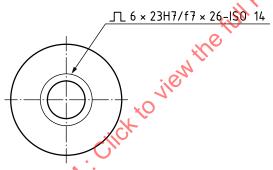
Example of indication to assembly drawings of straight-sided spline
